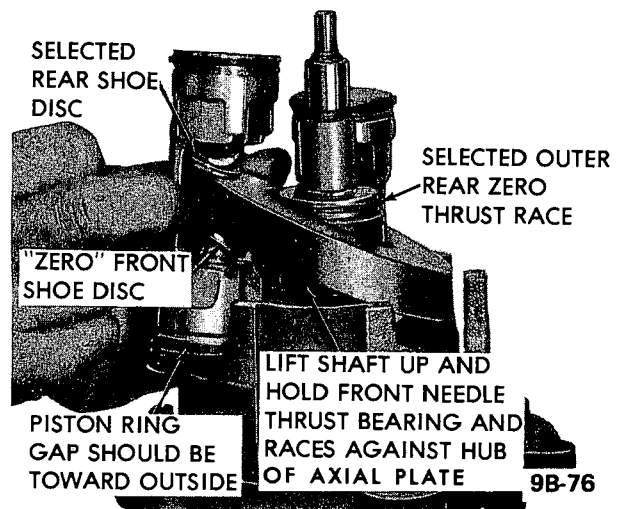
B-103 Installing Piston Assembly in Front Cylinder Half - 6 Cylinder Compressor
